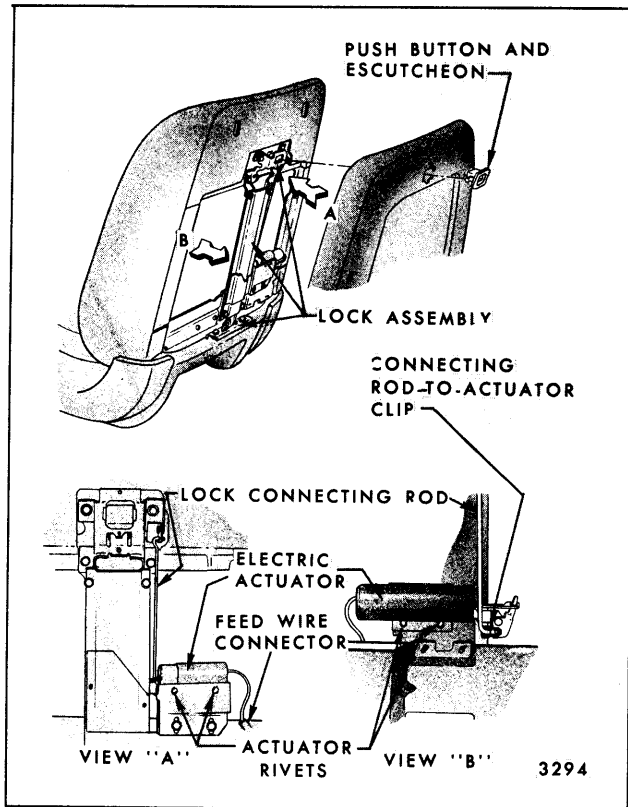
Strato Seat Back Electric Lock and Lock Actuator - Cadillac
